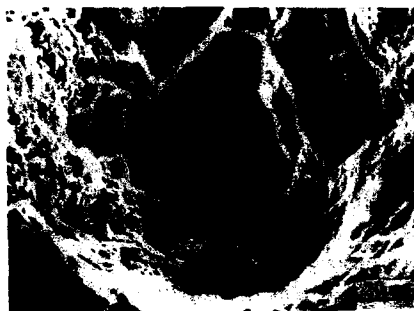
Scanning fractograph of fracture sample No. 15
